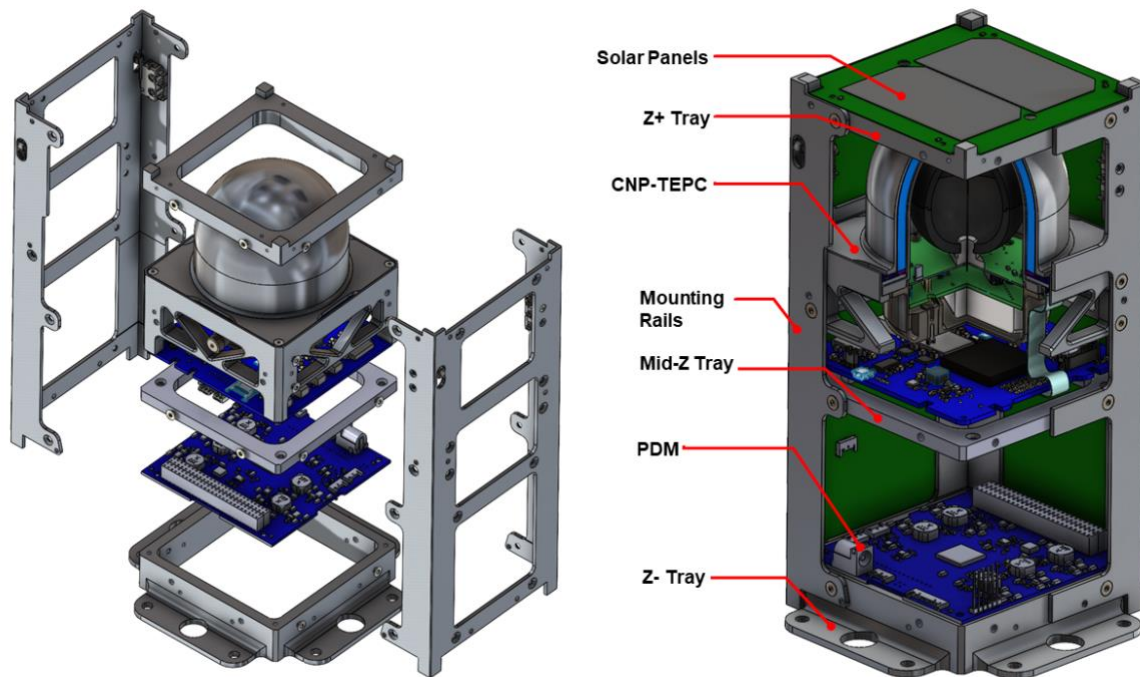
Payload components exploded (left) and assembled with cutaway (right). Some solar panels are not shown for clarity.
